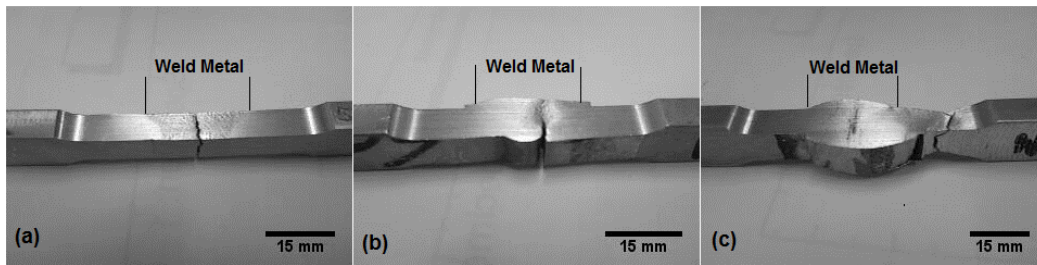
Representative photographs of the tensile fractures observed in 5083-H111 welded using ER5356, ER5183 and ER4043 filler wires: (a) fully dressed automatic weld; (b) undressed fully automatic weld; and (c) undressed semi-automatic weld.
